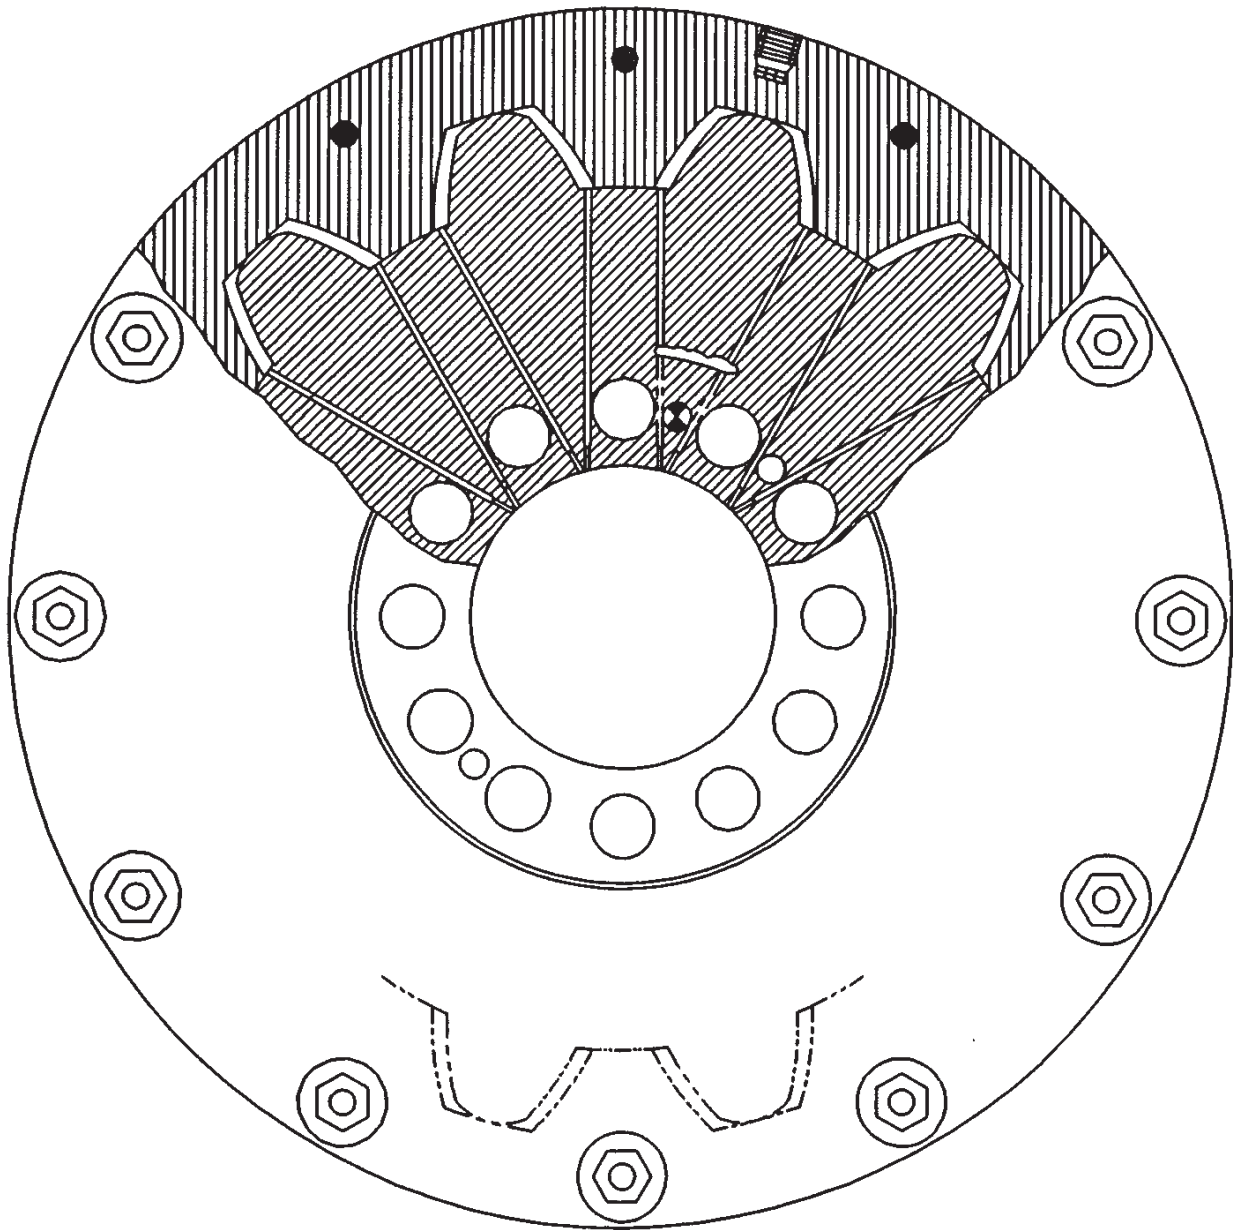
Gear Type or Hydraulic Type Vibration Damper
